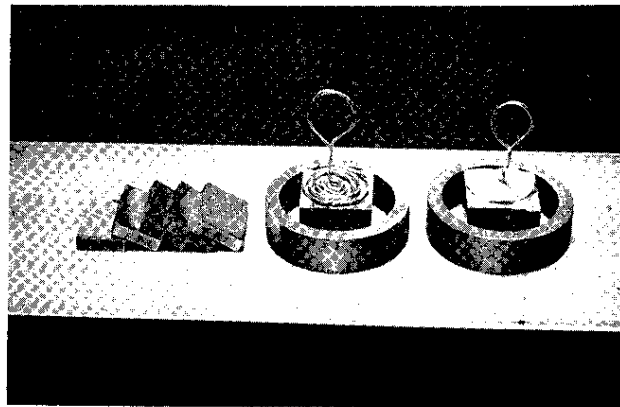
METHOD USED TO MACHINE LONGITUDINAL SECTIONS
